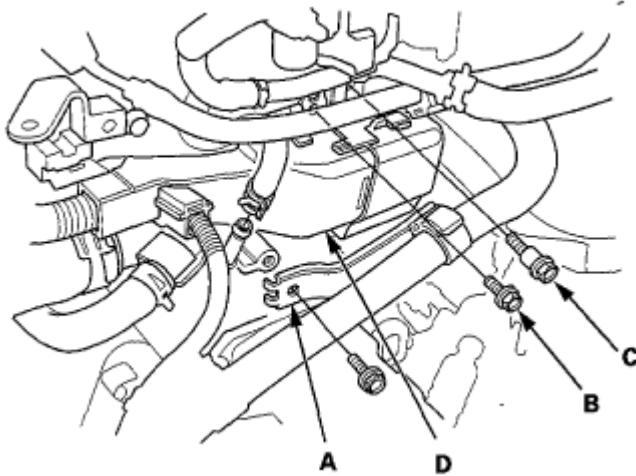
Locating Harness Holder Bolt And Harness Holder
